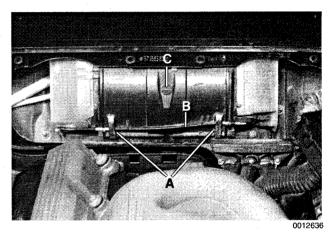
Blower motor housing clips (A); control cable (B); and center retainer (C).
